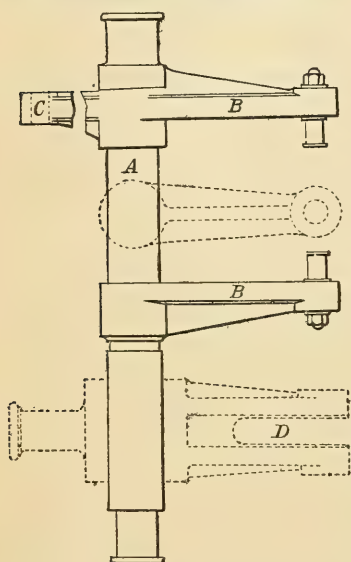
Wiper Shaft and Levers for Valve Motion.—A, Wiper shaft. B B, Levers for valve. C, Balance lever. D, Eccentric lever.
